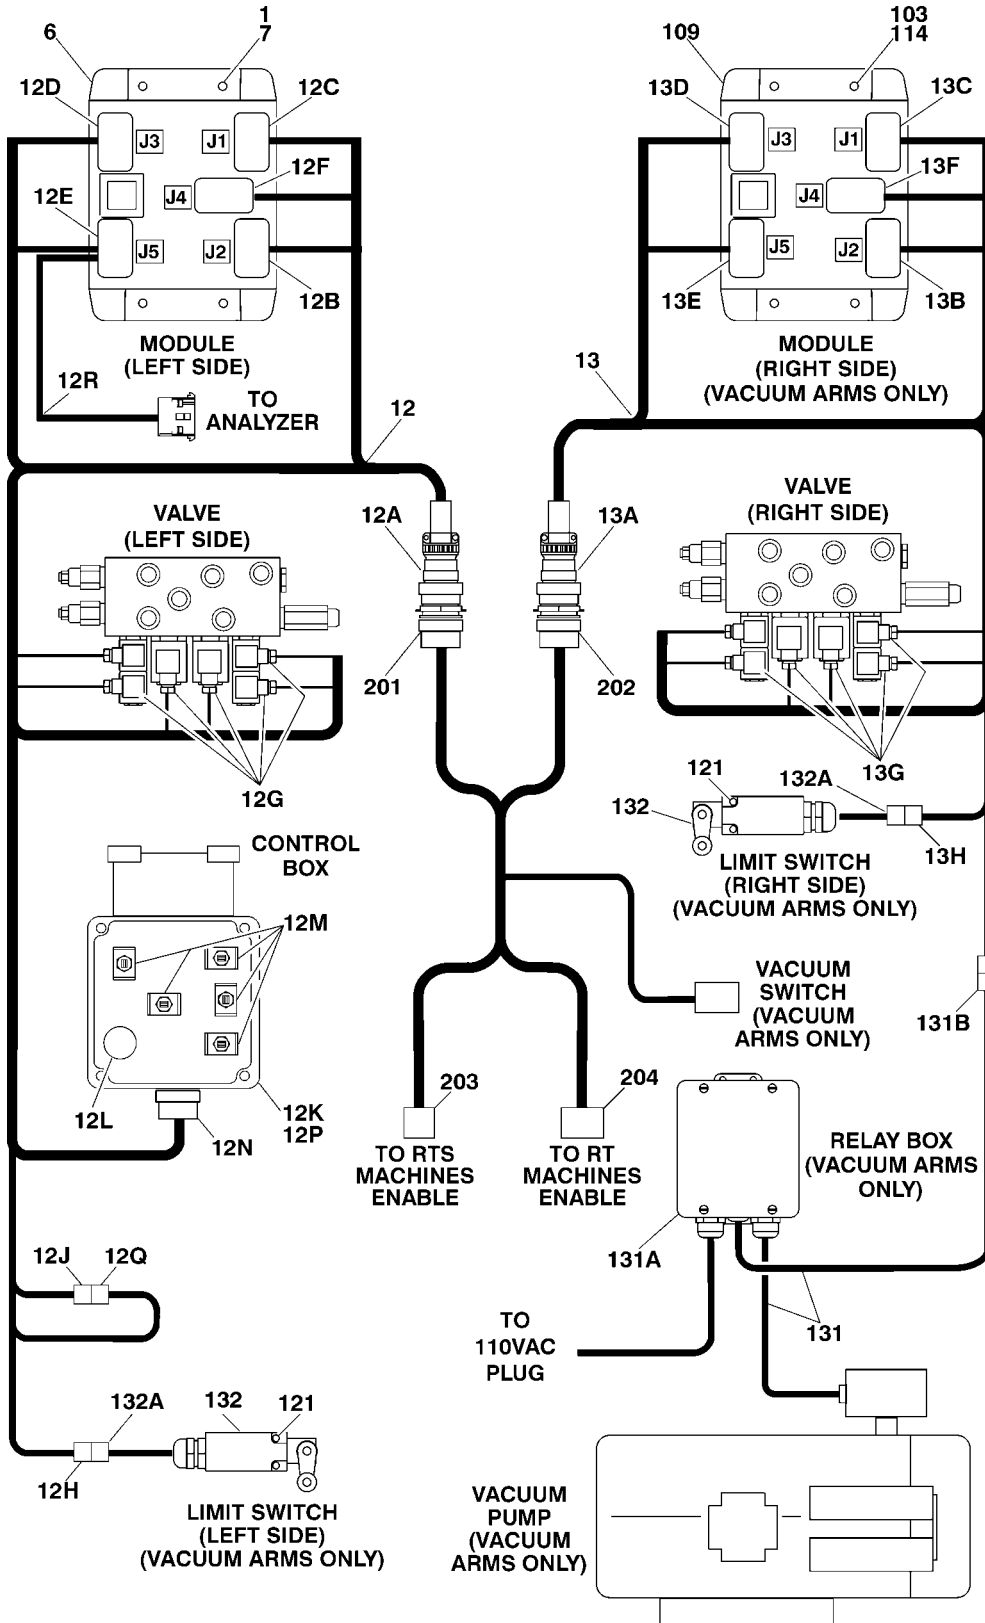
Easi-Cladder™ Plus Electrical Components Parts Drawing
